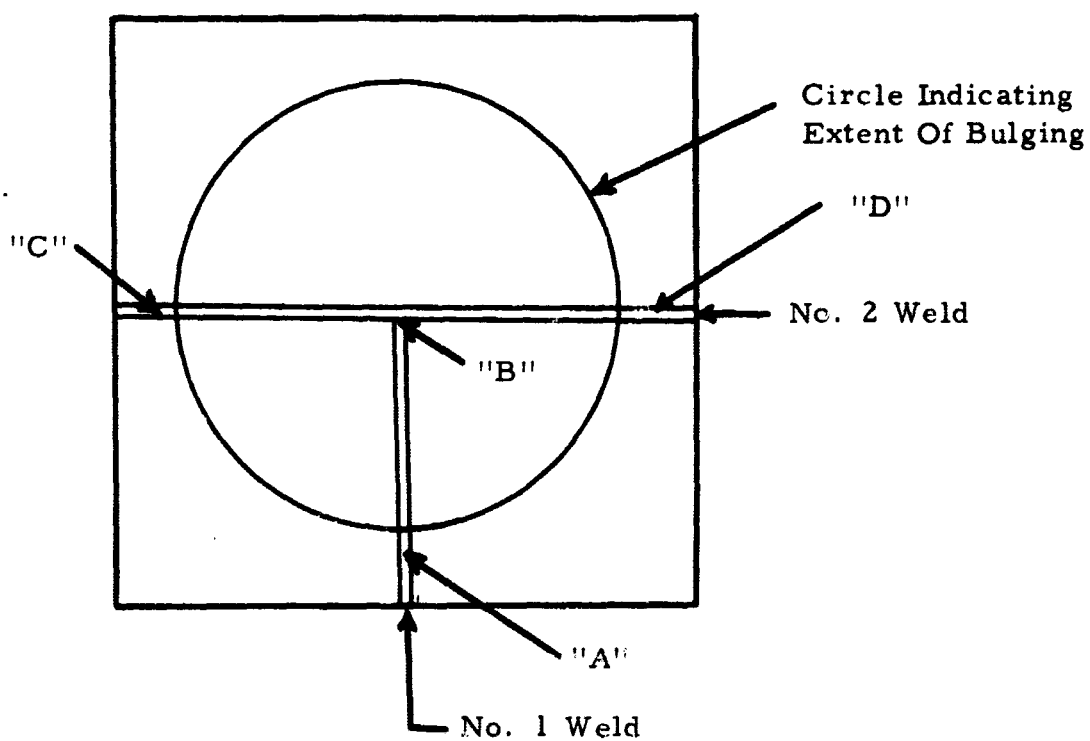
LOCATIONS USED FOR WELD MEASUREMENTS
